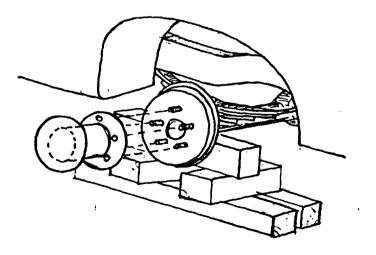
Locally Fabricated Cathead Mounted to a Rear Wheel Hub
